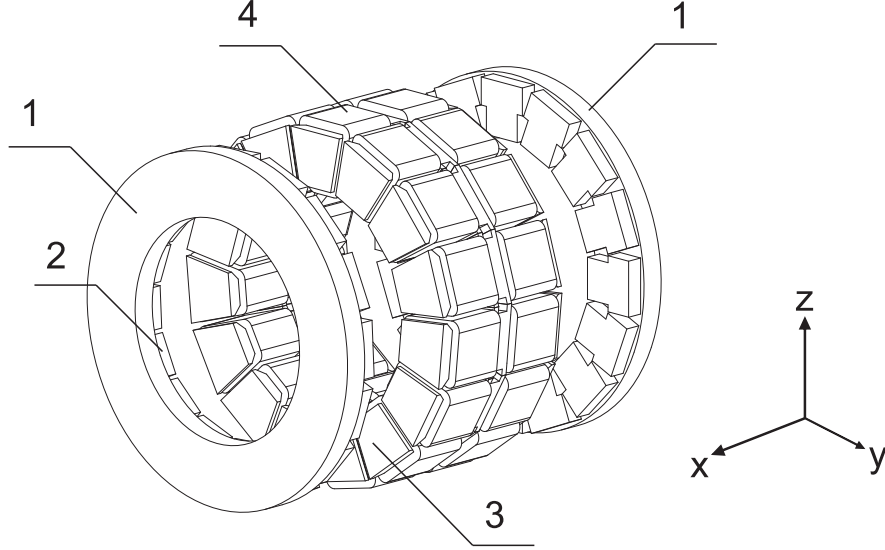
Double-rotor, single-stator, yoke-less, and segmented-armature axial flux PM machine. (1) Rotor disk, (2) permanent magnet, (3) laminated stack, and (4) winding [29].
